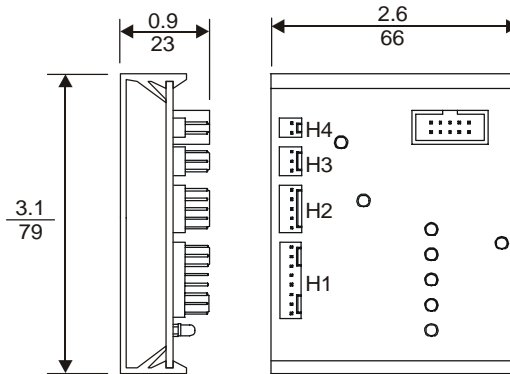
5-Triac Expansion Board Dimensions, in. (mm)
